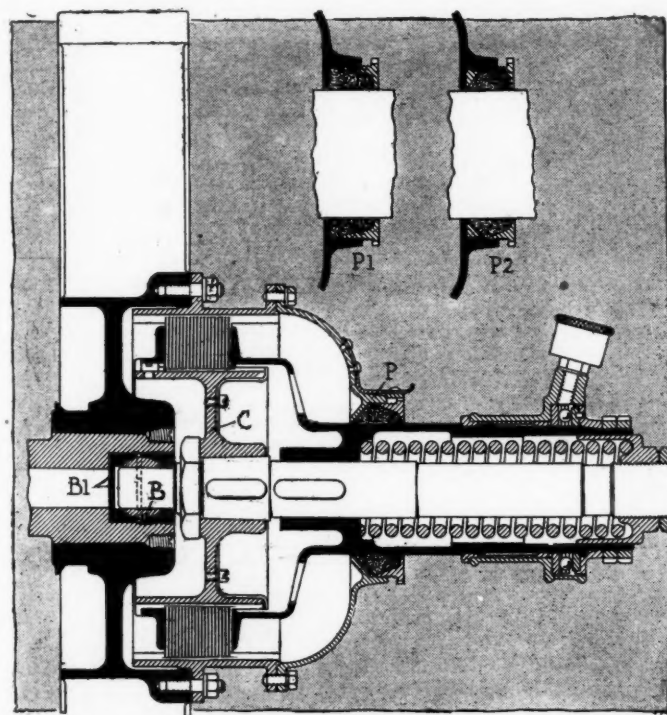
Fiat 65-disk clutch. Note insertion into crankshaft end to secure alignment. Above are shown two views of the stuffing box fitted to prevent oil from working out of the clutch housing
